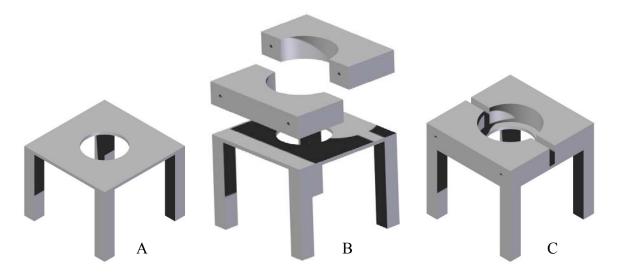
(A) Mounting base plate model, (B) exploded view of clamp with mounting plate, and (C) model final assembly of clamp onto mounting plate.
